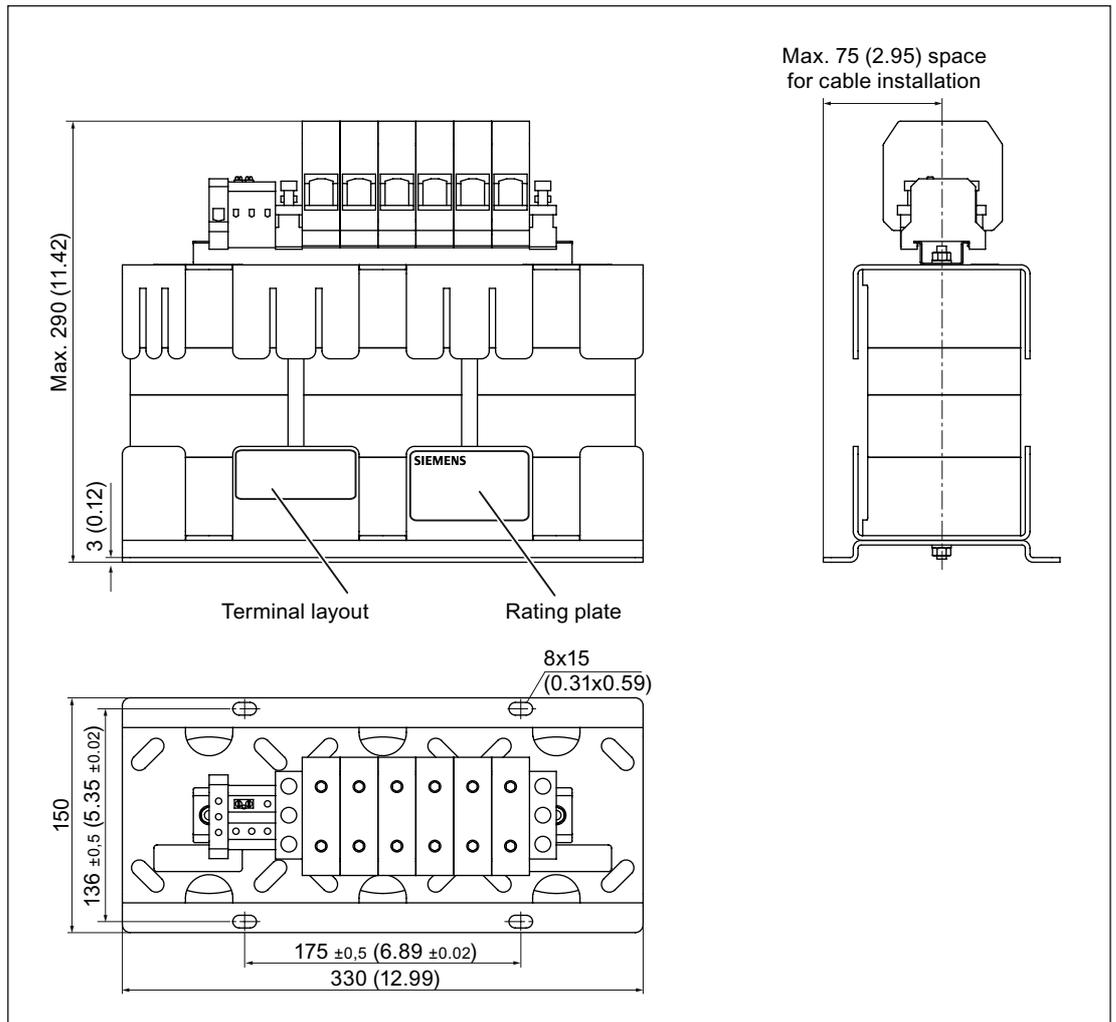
Dimension drawing of HFD line reactor 55 kW, all dimensions in mm and (inches)
